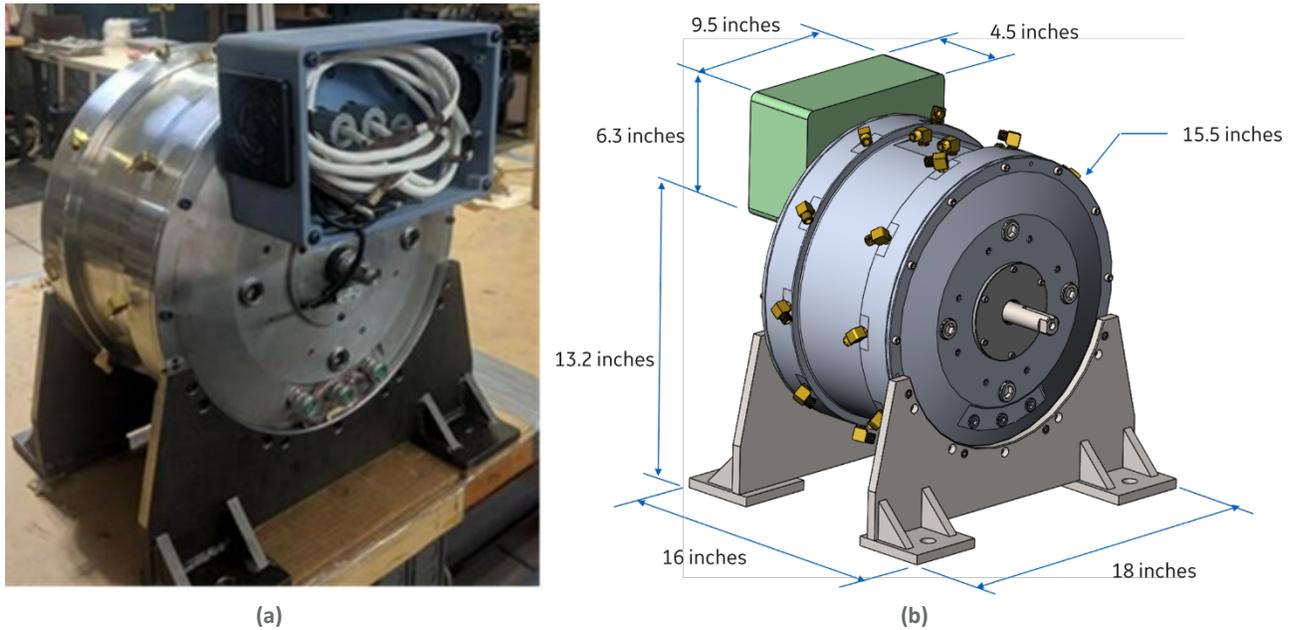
a) Fully assembled full-scale prototype motor. b) exterior dimensions of the prototype motor.
